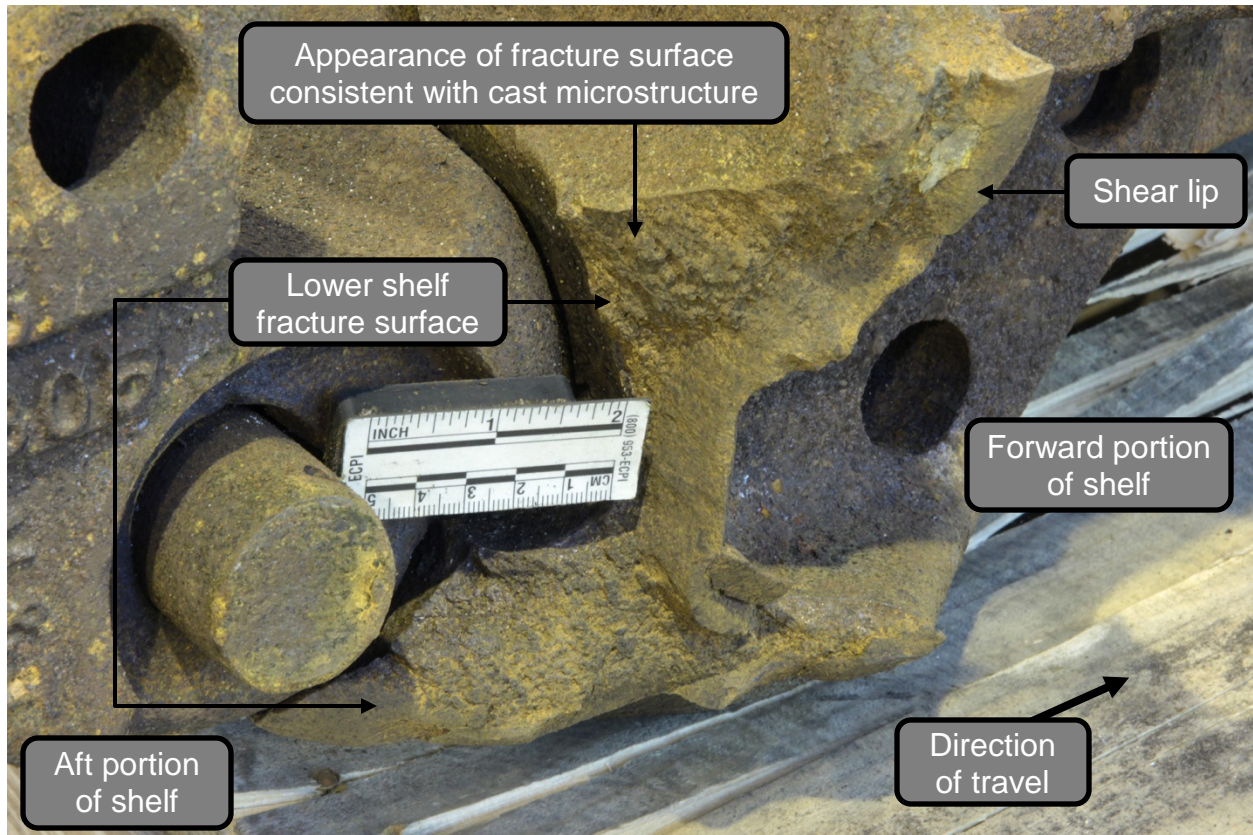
Image of the lower shelf fracture surface. The fracture features were consistent with an overstress fracture in forward bending.
